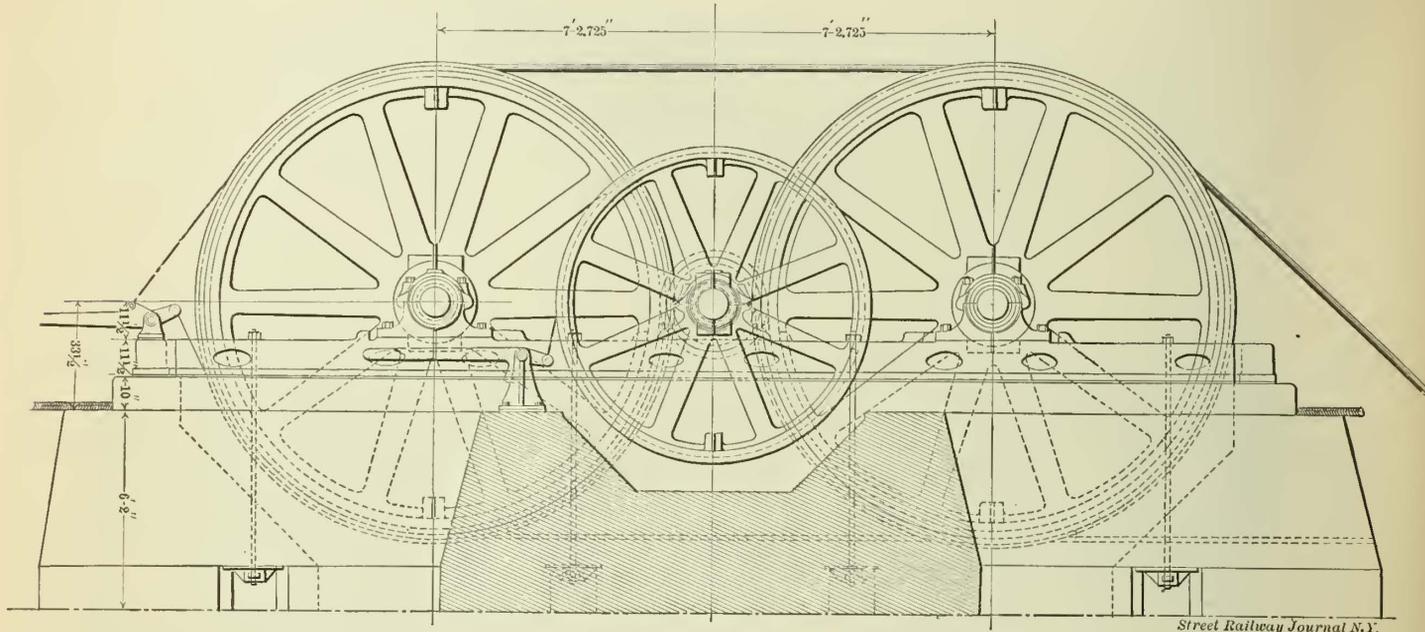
SIDE ELEVATION OF DRIVING MACHINERY—OTIS ELEVATING RAILWAY.
